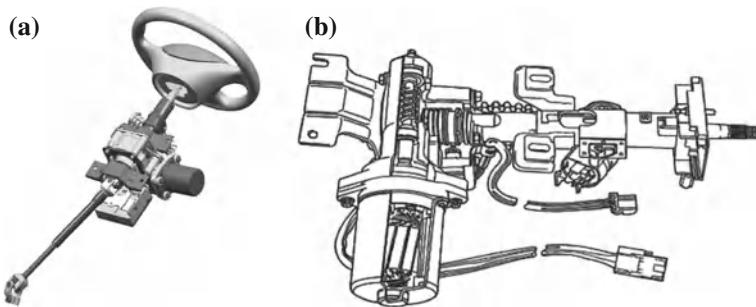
Electric power steering system (EPS) showing an electric motor working on the steering column. a A view of the assembly and b a detail of the motor with reduction gearbox (courtesy of Fiat)
